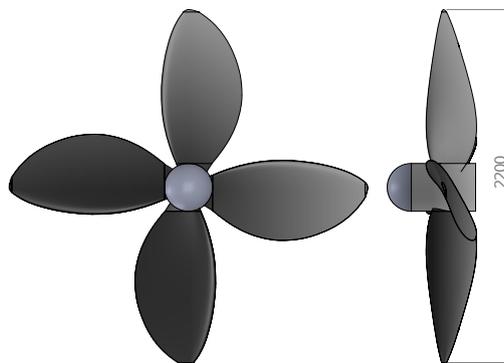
HYDROK-4 blades turbine (dimensions in millimetres).
